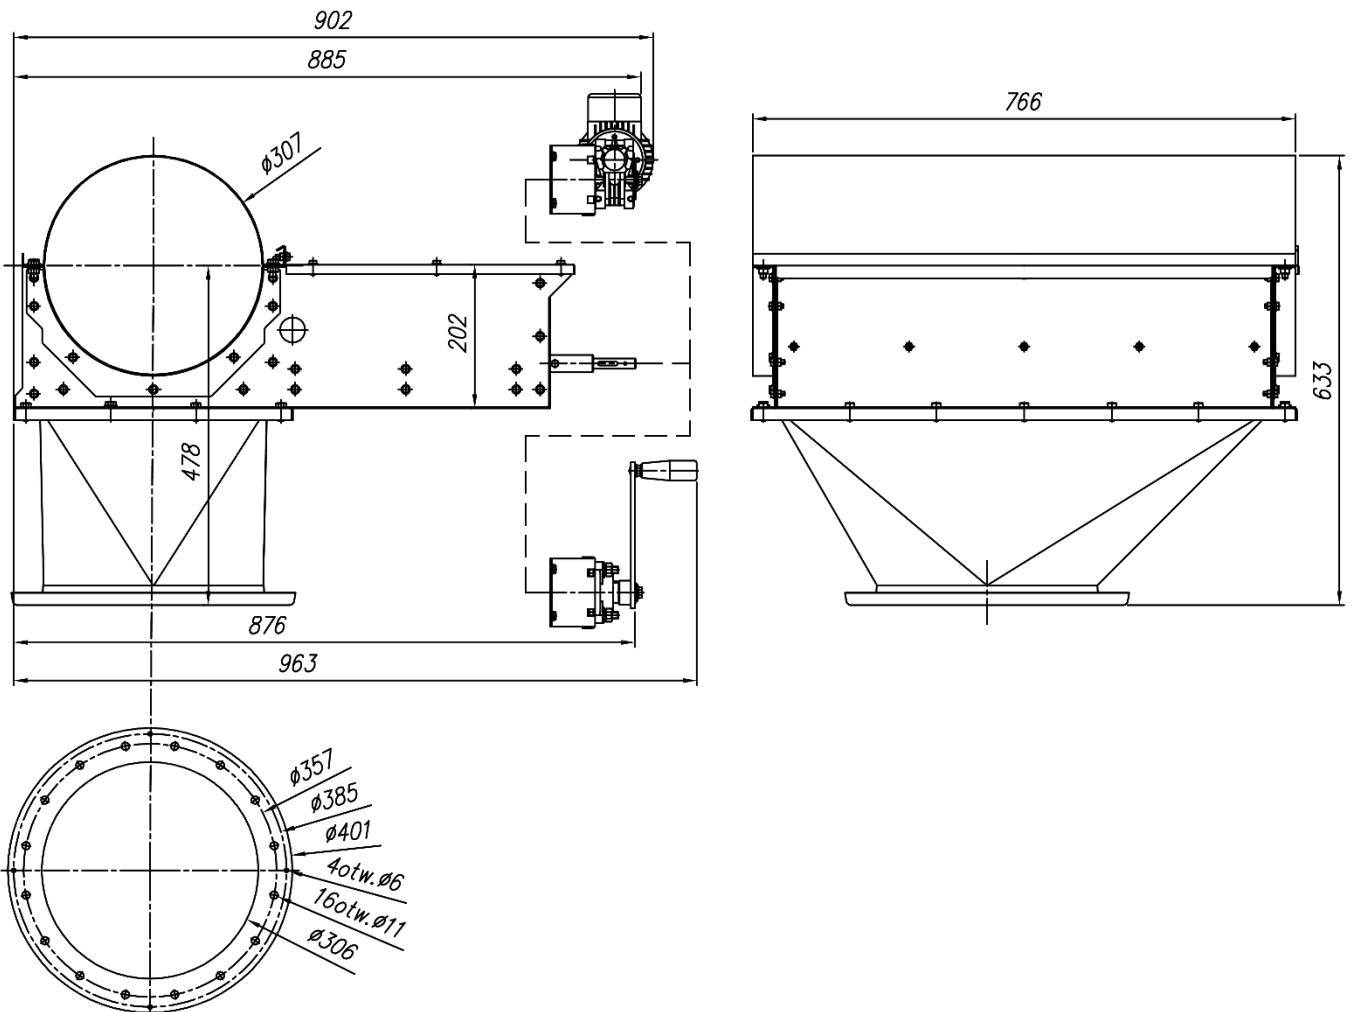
Basic installation dimensions of PSX300-ZAS/... shutters. (dimensions as mm).
